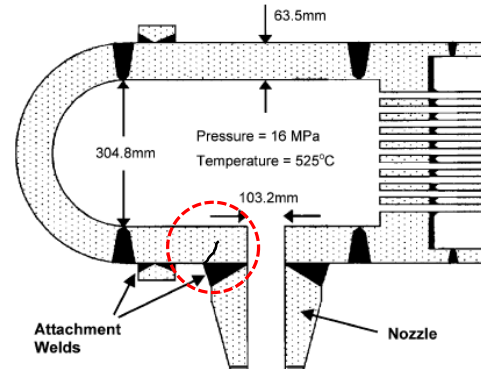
Schematic diagram showing arrangement in an steam header. Sampling area near the header-nozzle weld is marked in red.
